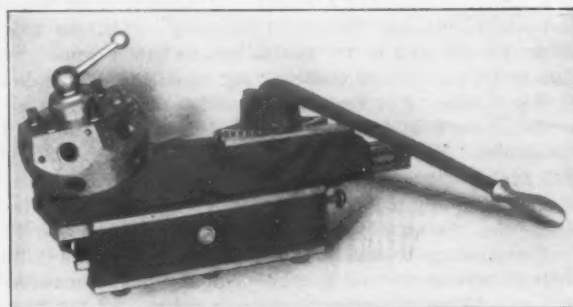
Detail Showing Provision for Aligning the Turret Holes with the Spindle Center.
